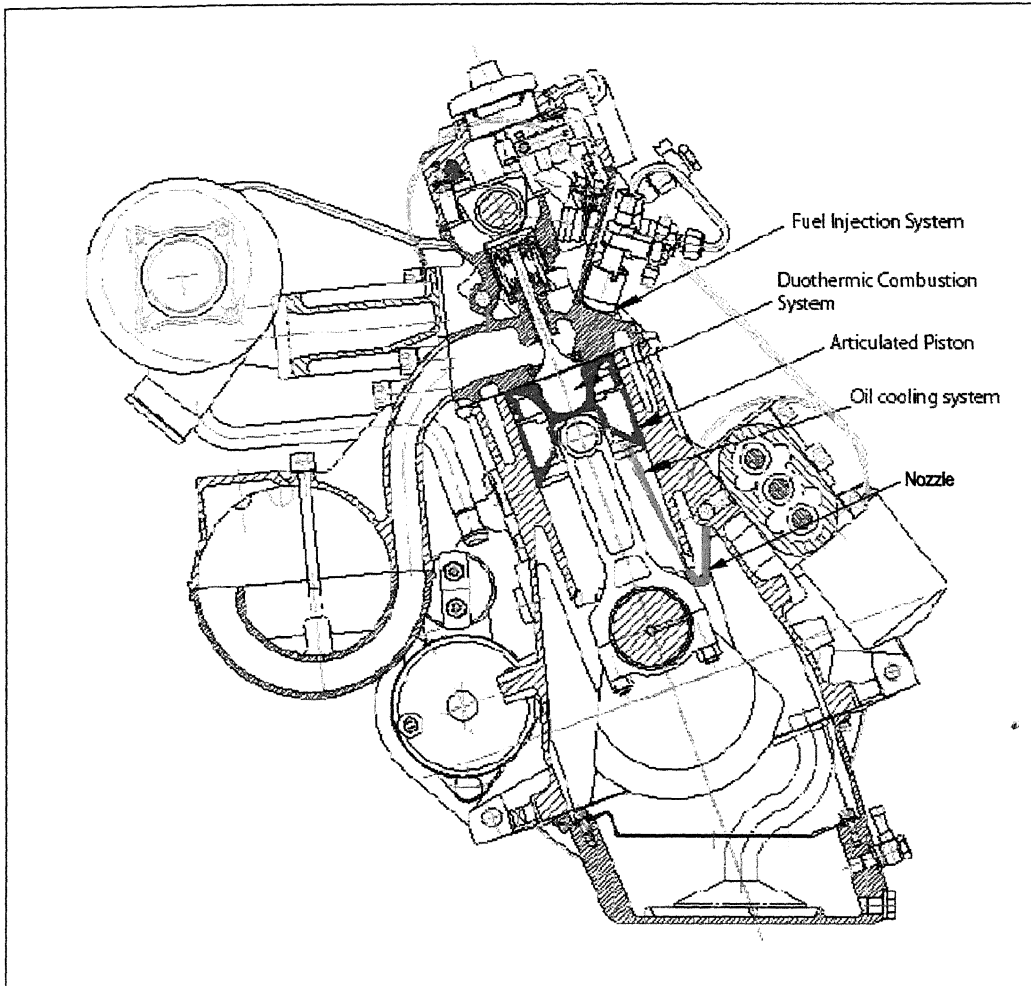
Cross-Sectional View of a Heavy Duty Diesel Engine Using an Oil Jet for Cooling of Piston [5]
